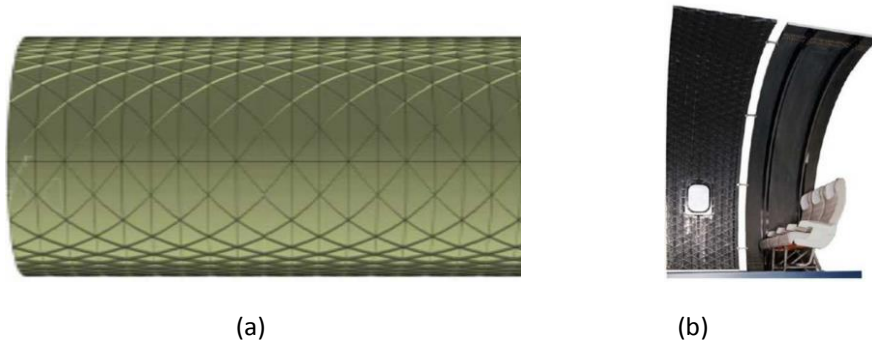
Side view of the optimal reinforcement pattern under multi-load cases in use of 1D beam element to model the fuselage with windows
